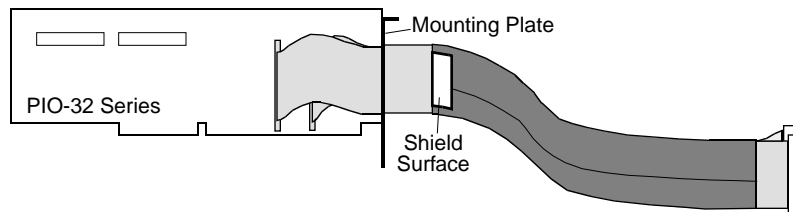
Jacket with Flaps Folded Back to Expose Shield Surface
